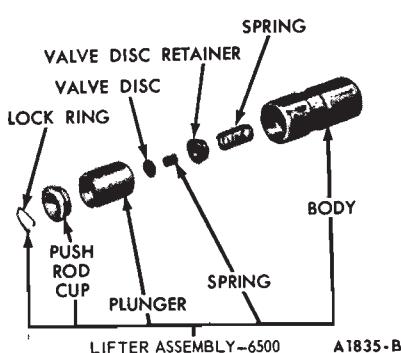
Typical Hydraulic Valve Lifter Assembly
